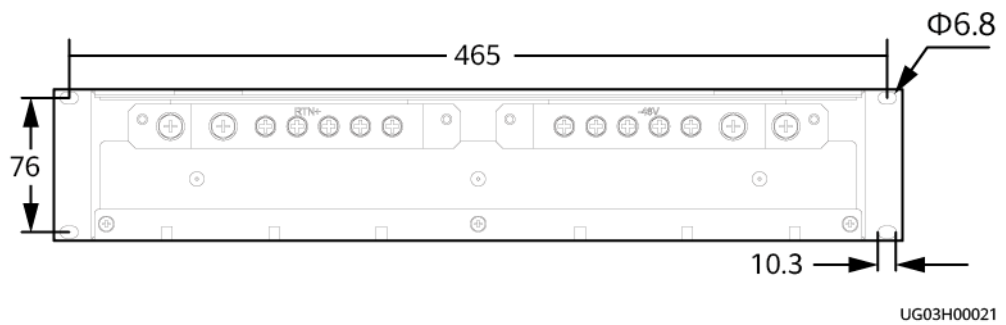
Busbar mounting hole dimensions (unit: mm)
